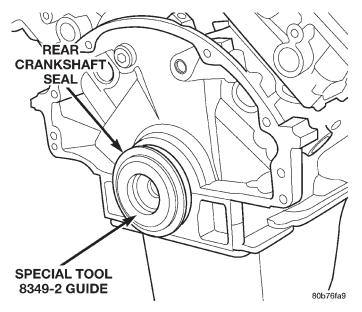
Crankshaft Rear Oil Seal Guide Special Tool 8349–2 and Oil Seal
